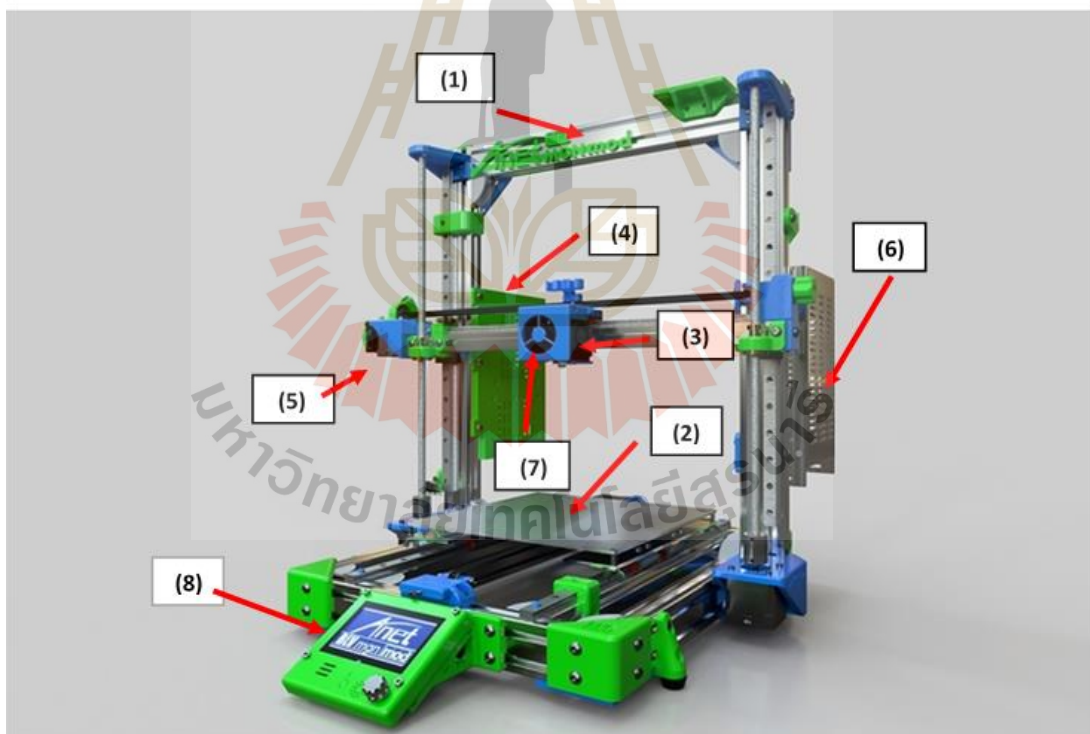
Schematic of the conventional FDM 3D printer, which has main components consisting of (1) frame, (2) build platform/print bed, (3) extruder, (4) controller board, (5) stepper motor, (6) power supply, (7) cooling fan, and (8) LCD.
